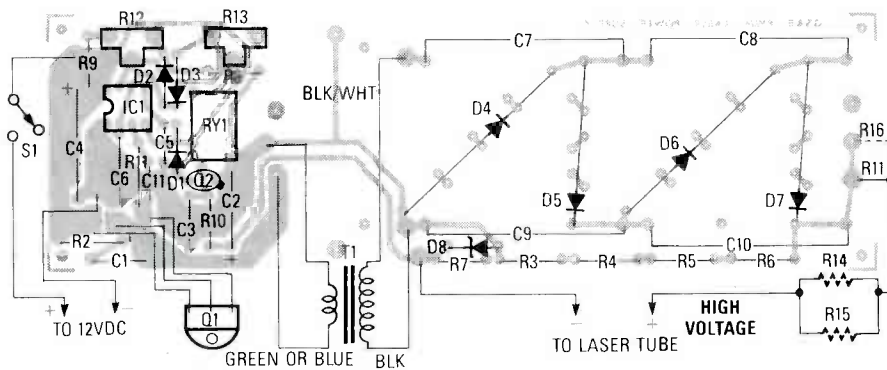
THE PARTS LAYOUT. Although R16 mounts on the PC board, R15 and R16 are spliced into the laser tube's anode wire.
